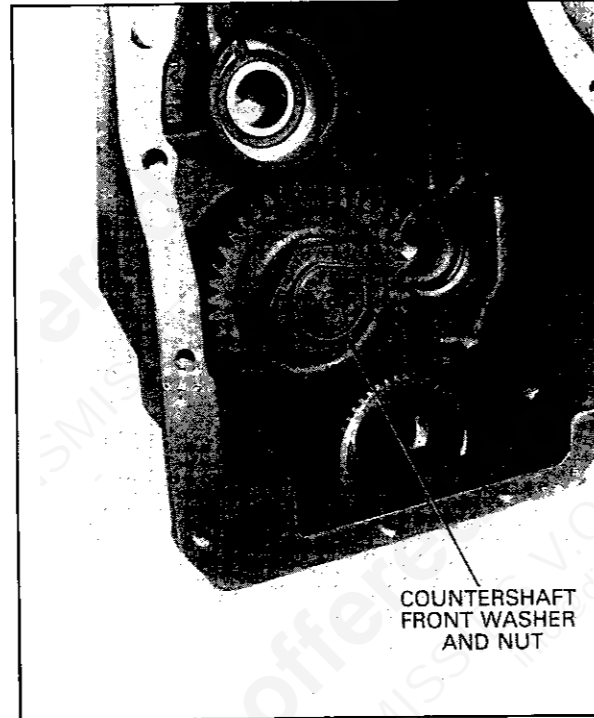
COUNTERSHAFT FRONT NUT INSTALLATION
